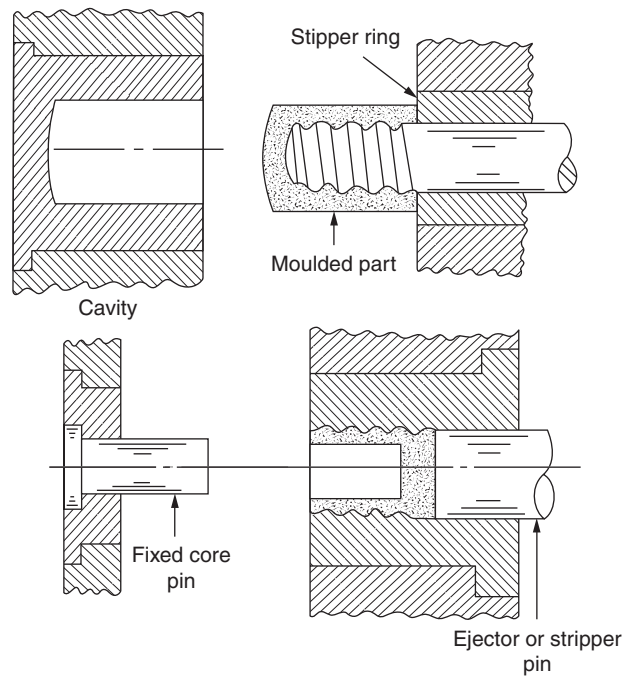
An internal undercut can be moulded by using two separate core pins.
